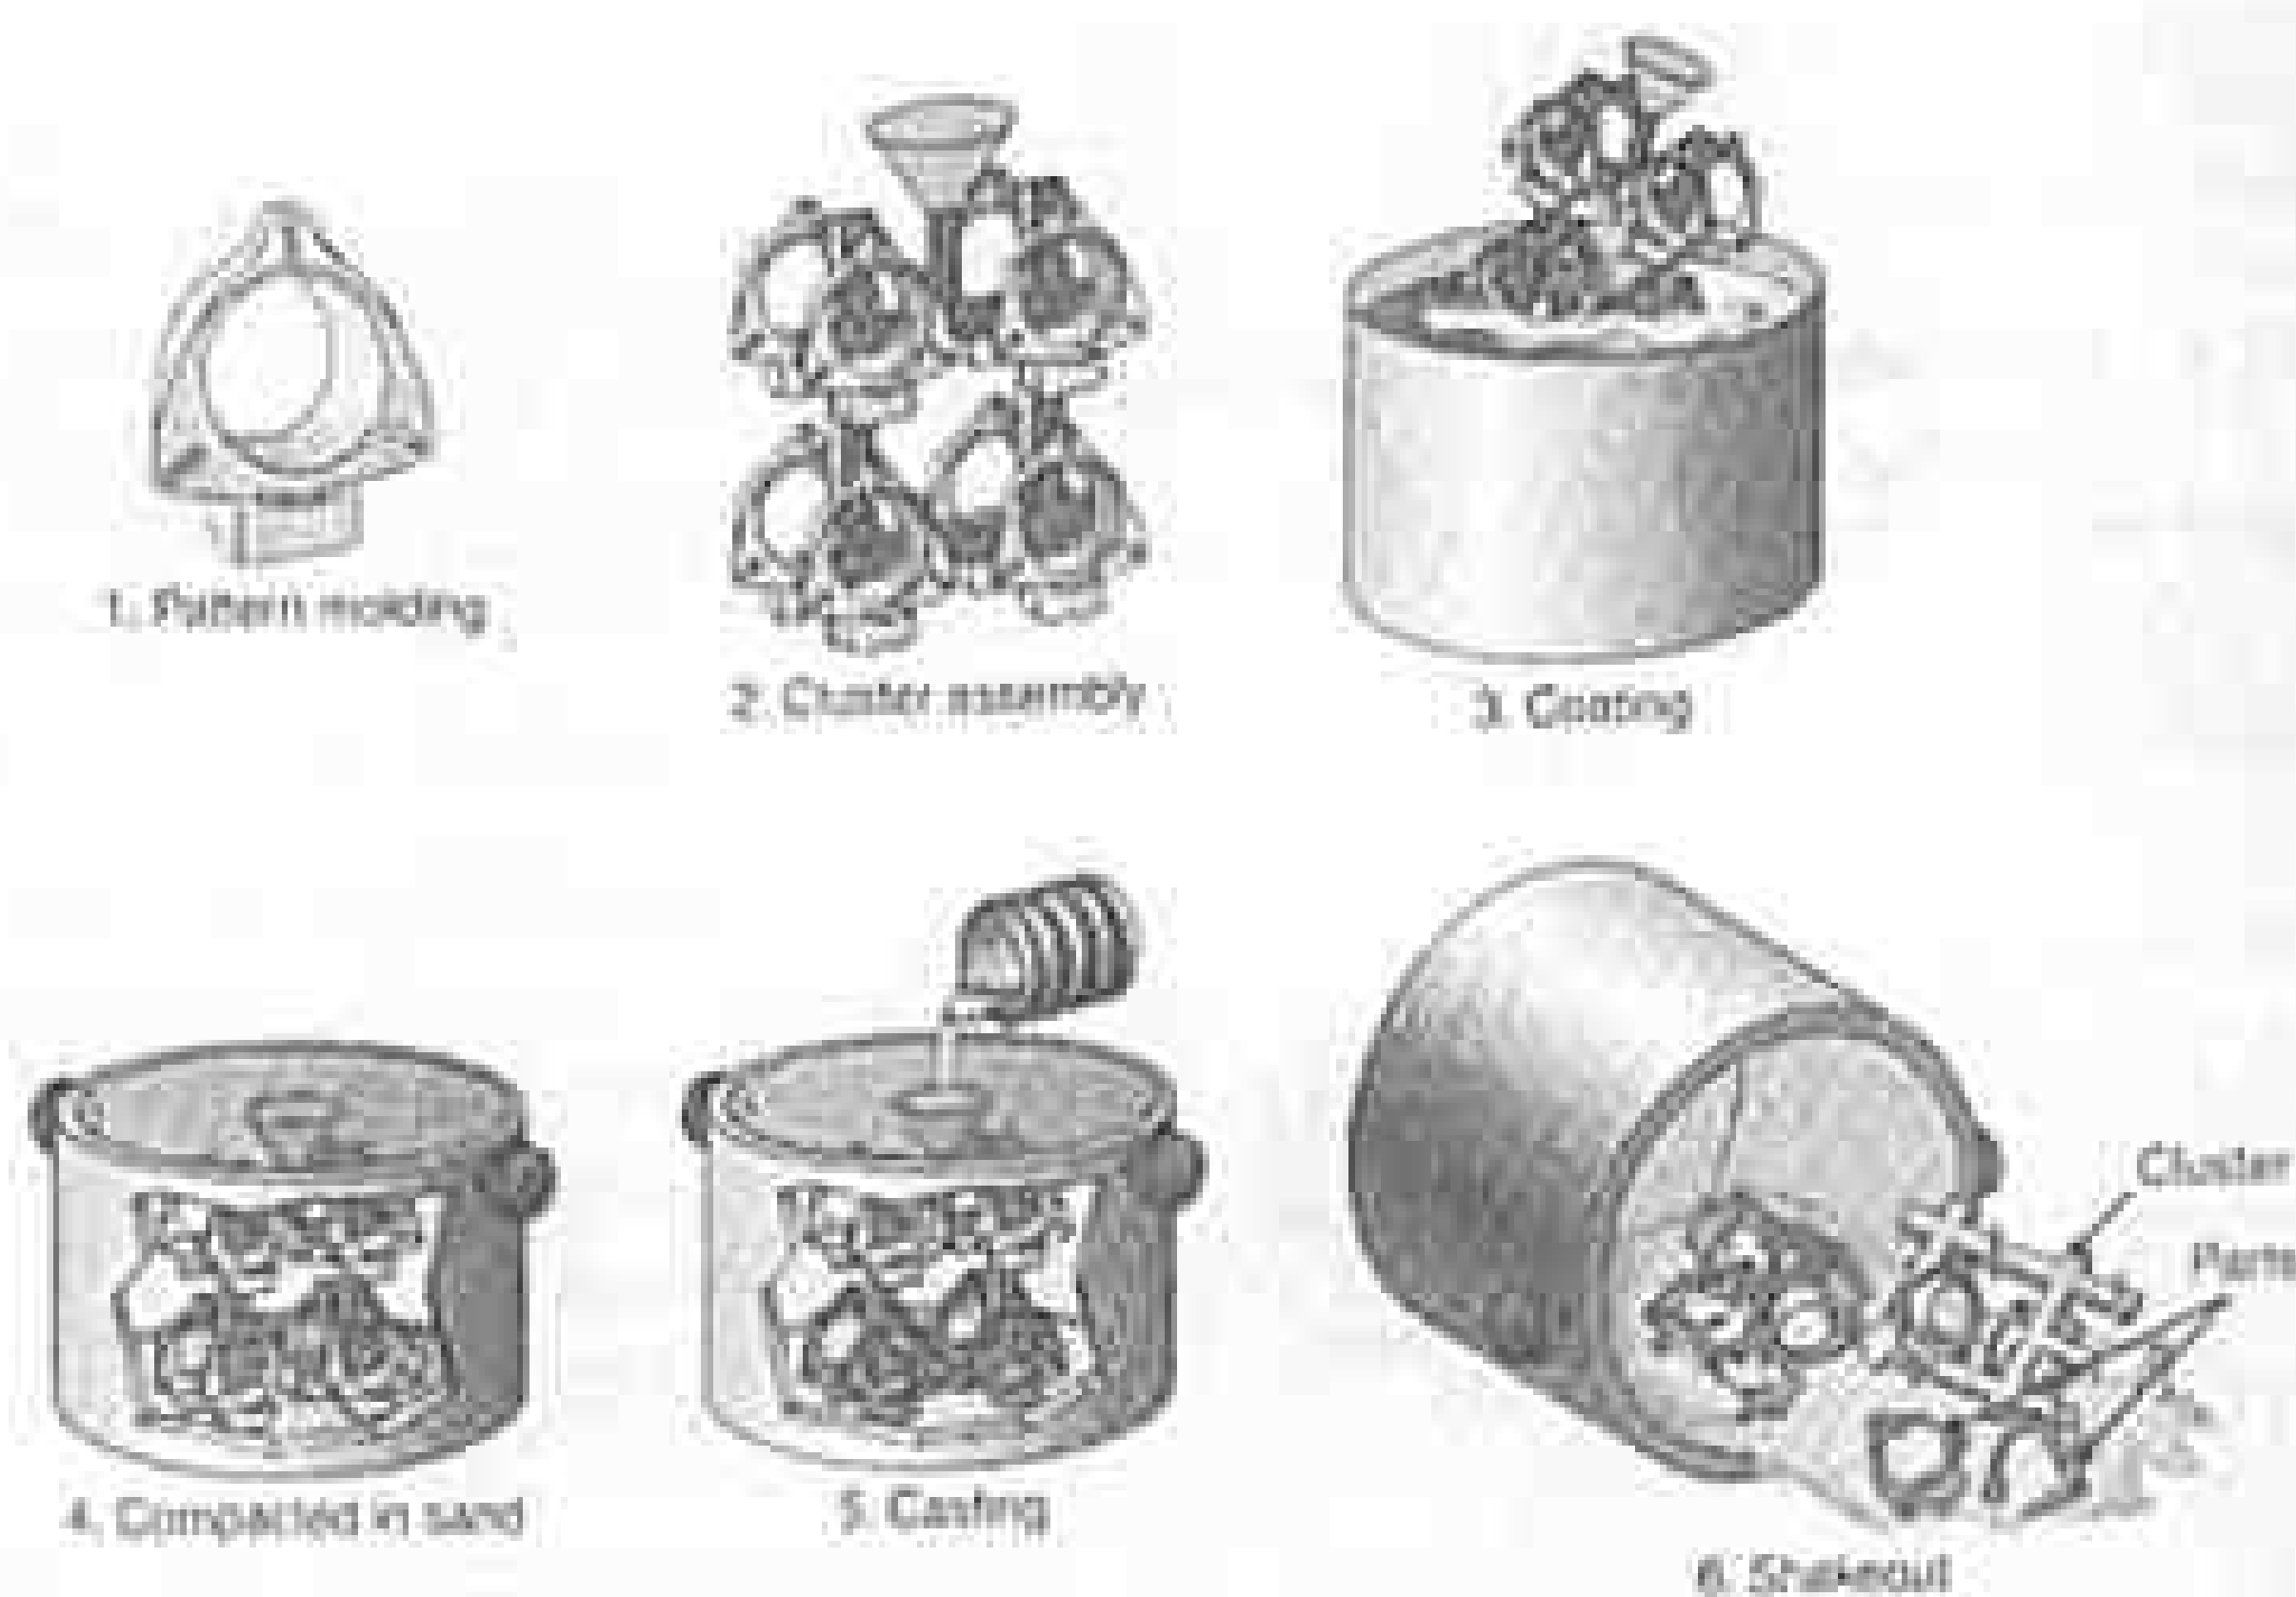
Schematic illustration of the expendable-pattern casting process, also known as lost-foam or evaporative-pattern casting.
